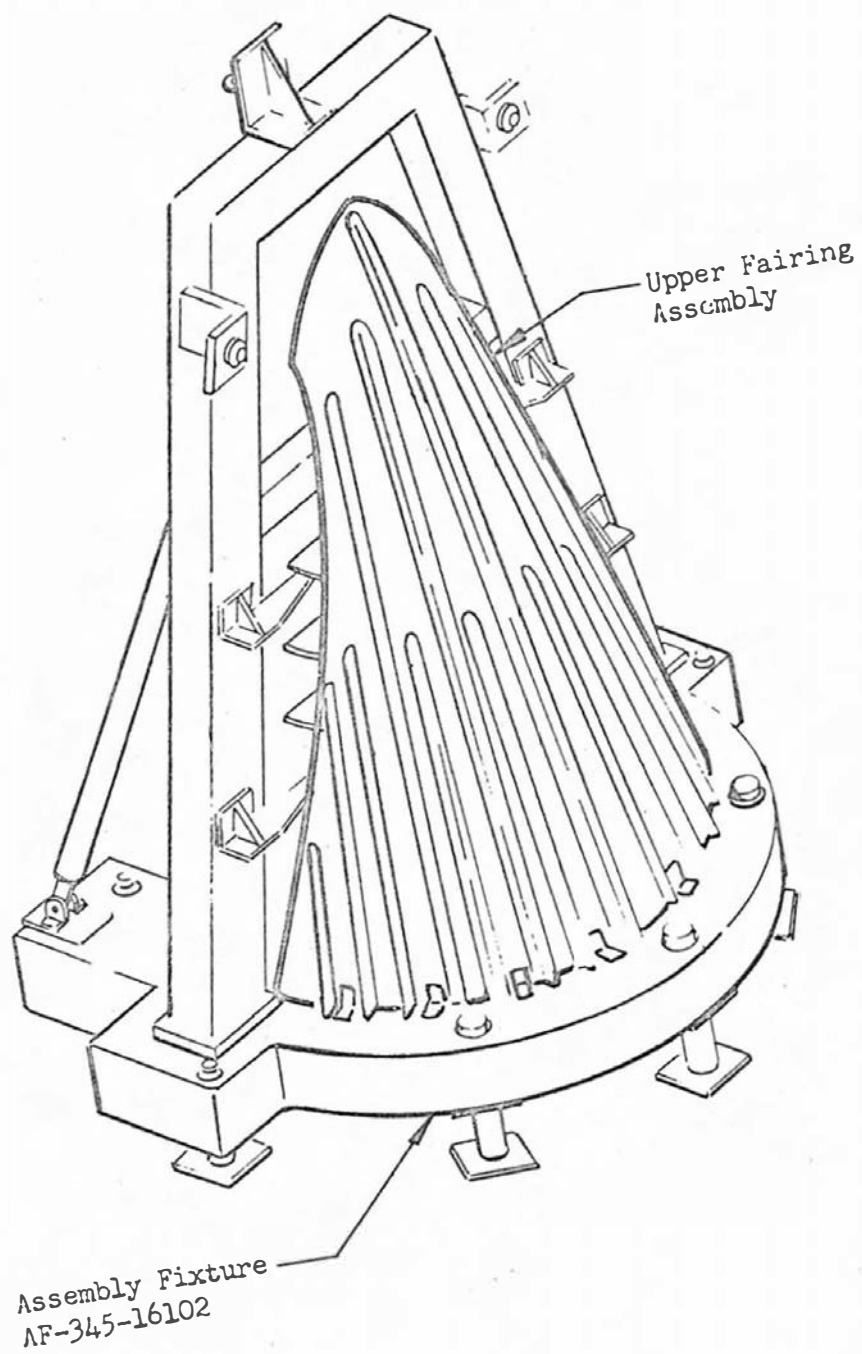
17. Assembly Fixture for Upper Fairing Assembly
